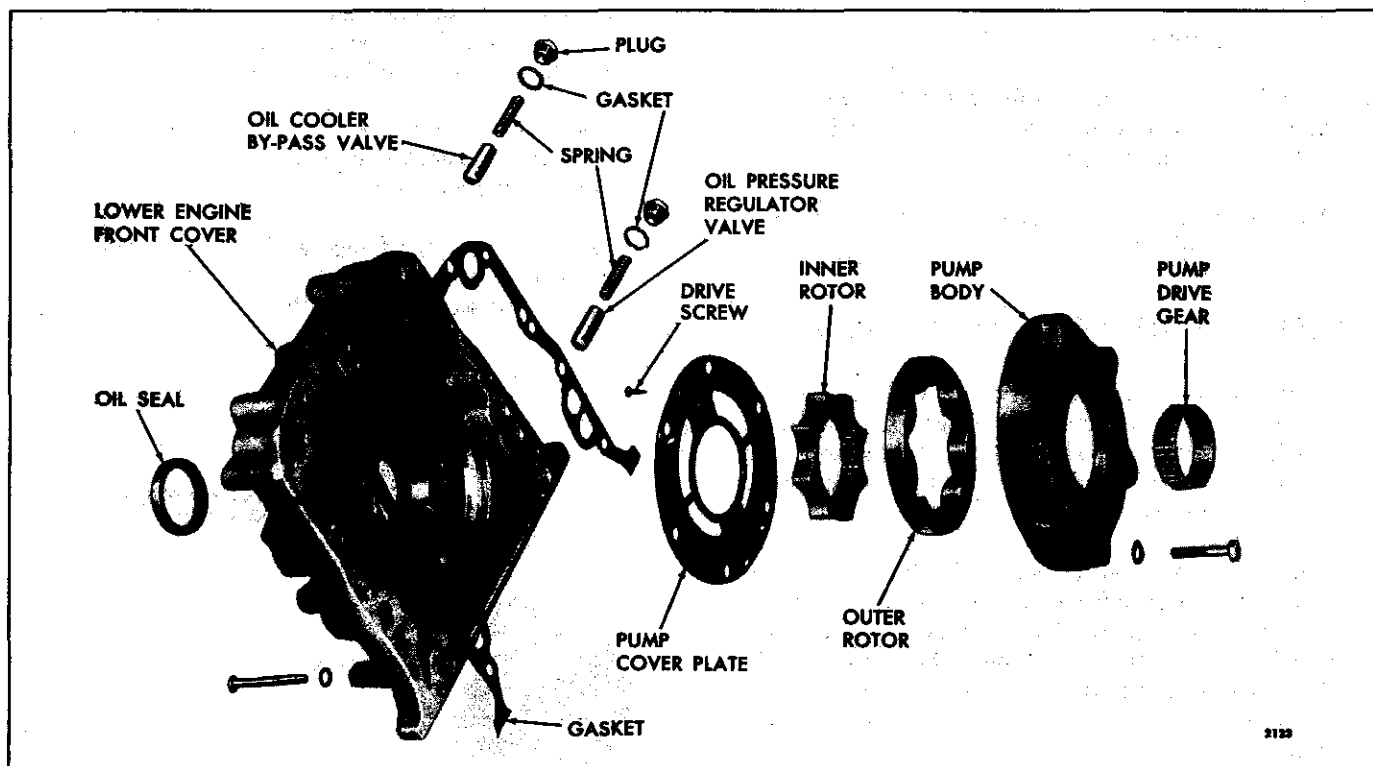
Oil Pump Details and Relative Location of Parts (Former)
